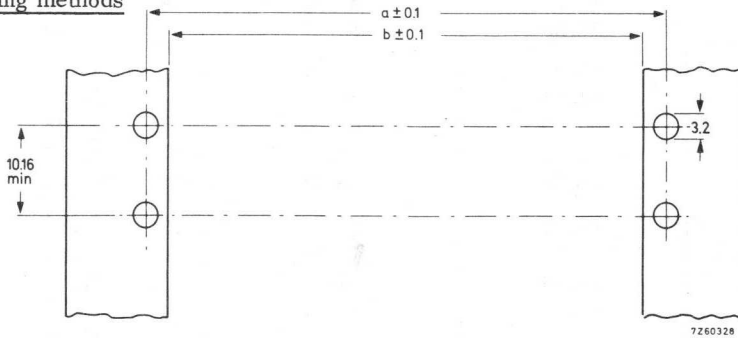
Rail mounting; for dimensions a and b, see Table 2.
